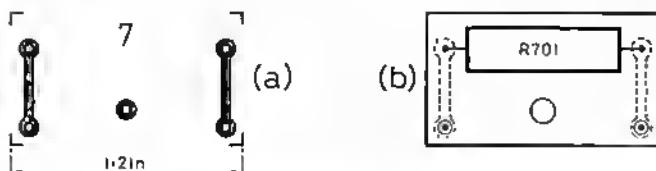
Board (PCB7) for mounting heater dropper resistor. (a) Etching. (b) Assembly
